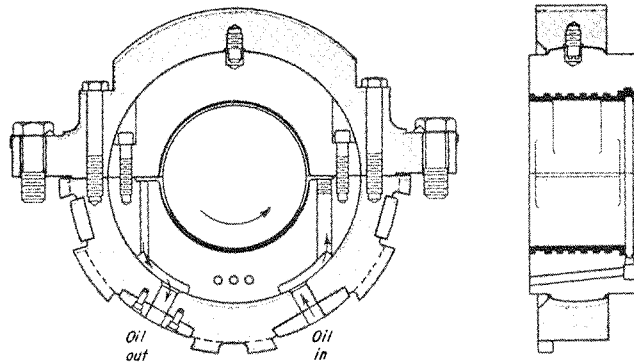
Journal bearing has a spherical seat for self-alignment. Oil builds a wedge at the bottom to lubricate shaft, and oil pressure builds at the top to keep shaft stabilized in bearing.
